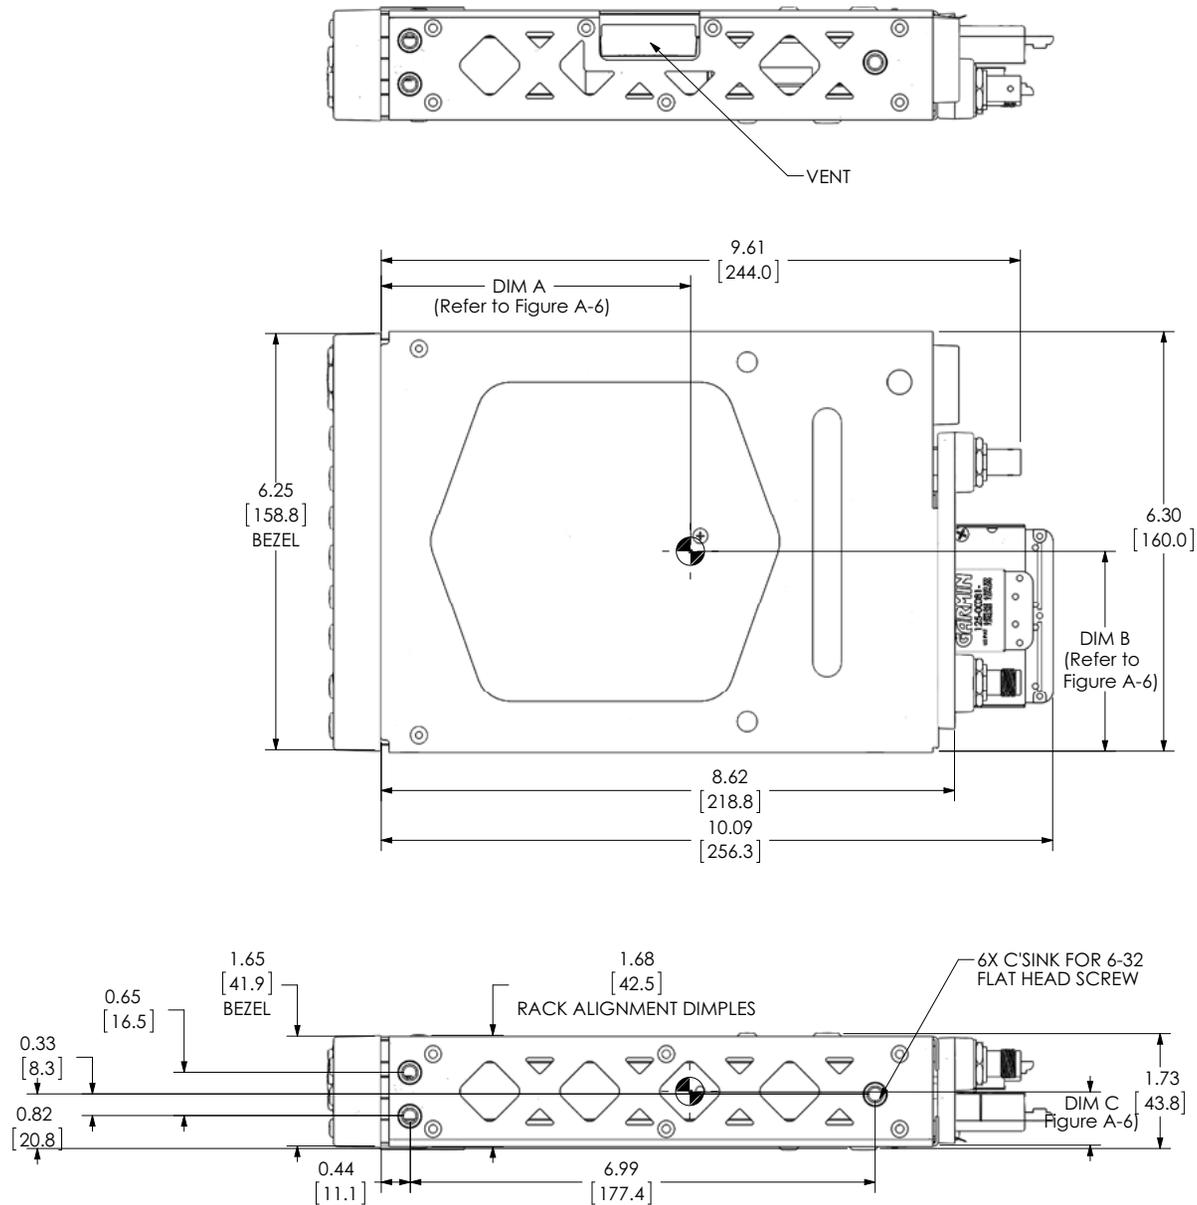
Typical GTX 3X5 Panel Mount Dimensions and Center of Gravity
